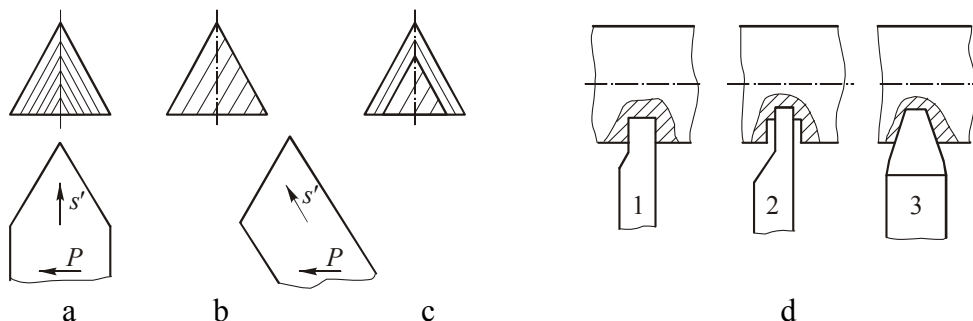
Thread cutting methods: (a) profile; (b) generating; (c) combination; (d) for acme thread
